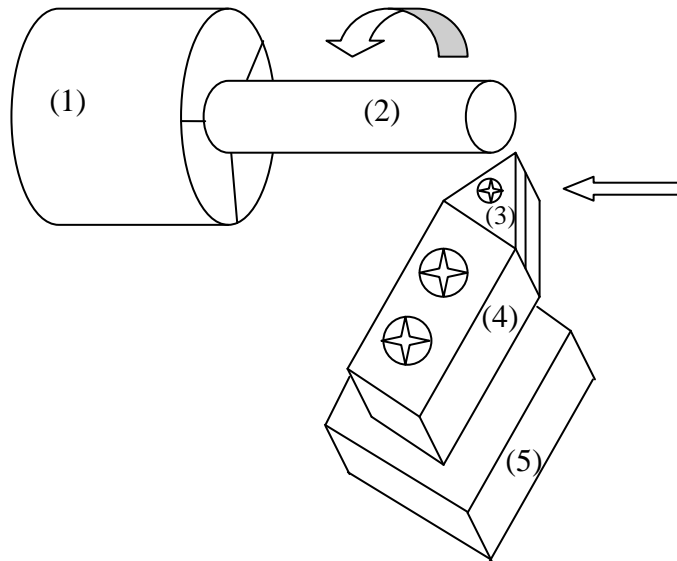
Experimental parameters and setup: (1) chuck to hold work piece, (2) workpiece in bar shape, (3) cutting tool insert, (4) tool holder, and (5) piezo-electric dynamometer.
